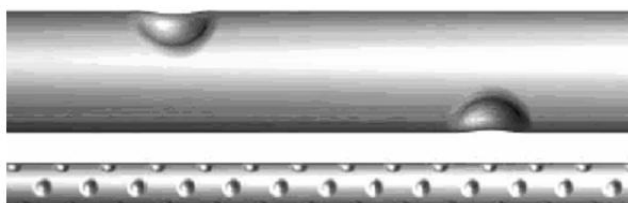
Tubes with spherical dimples manufactured by HRS Group (Spain): large-dimple and small-dimple configurations.
